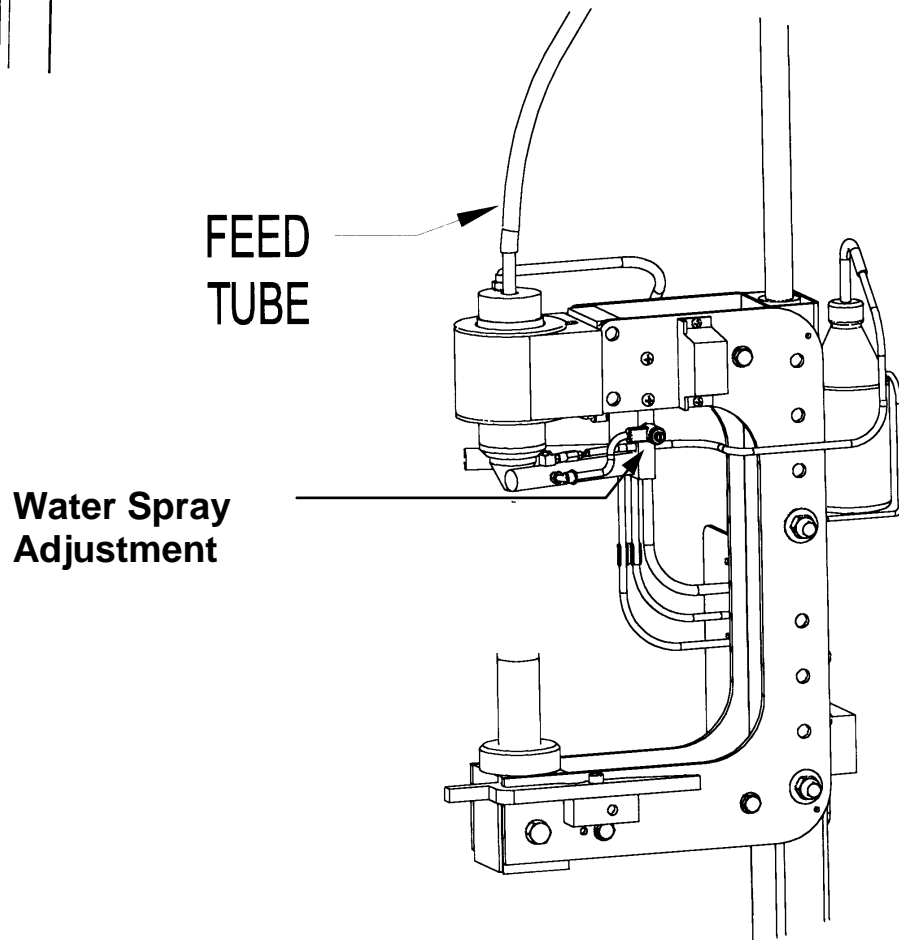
HEAD & SPRAY GUIDE ASSEMBLY BREAKDOWN
